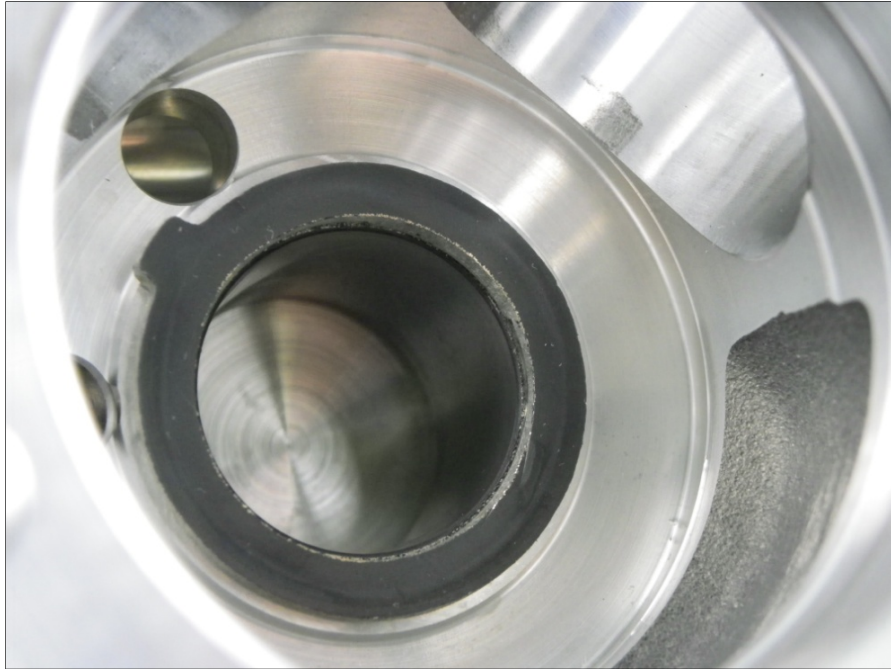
Rear Pump Body Camshaft Bushing, SPK
